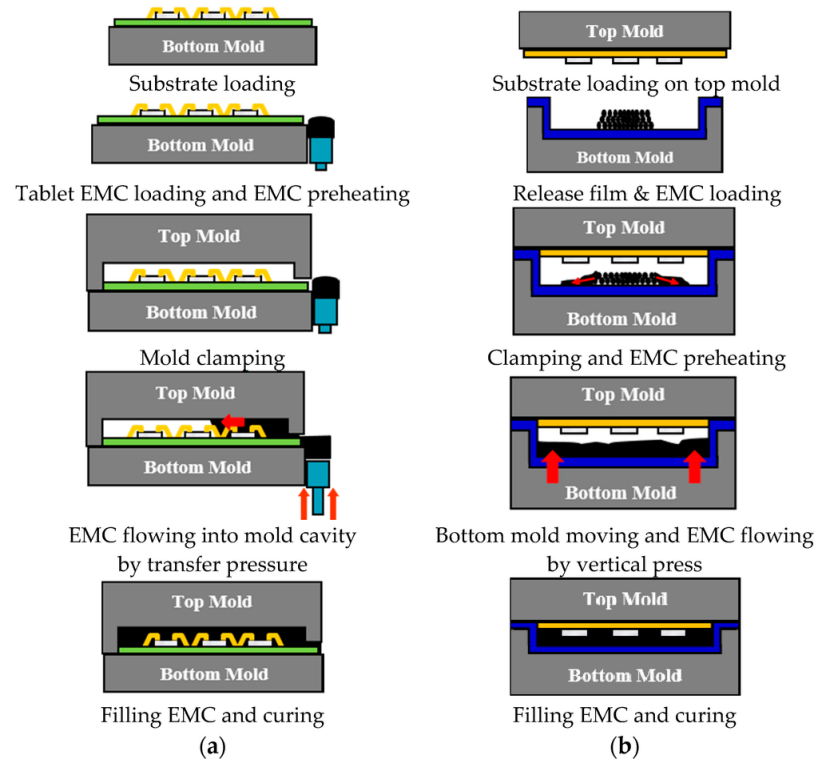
Process of (a) transfer molding method (b) compression molding method¹¹
